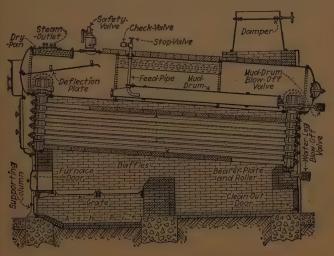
Longitudinal section of single-pass Heine boiler.
